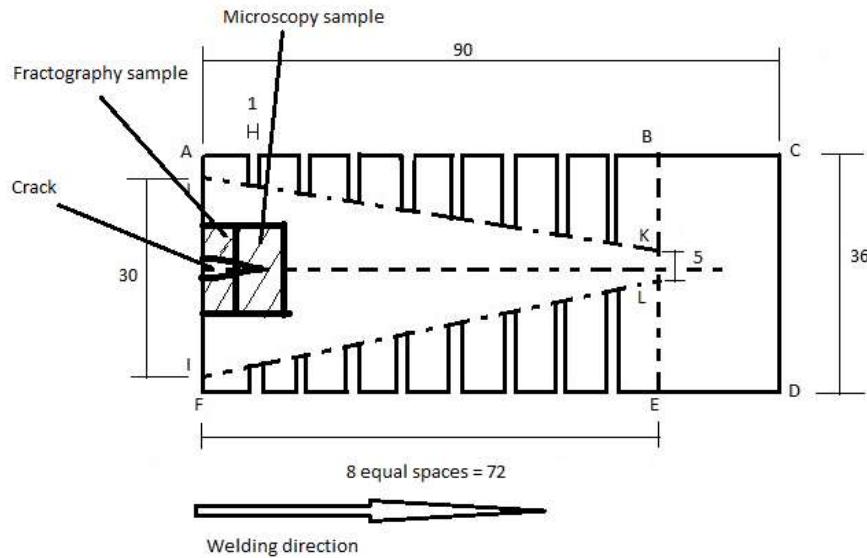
Dimensions of the modified Houldcroft sample. Sectioning of the sample for microstructural and fractography examination are also shown. Automatic autogenous gas tungsten arc welding (GTAW) bead on plate using a Lincoln Electric Square Wave TIG – 355 equipment was employed. The shielding gas was a 99.99% Argon. The welding started on a run-on tab of the same ferritic stainless steel before continuing on the Houldcroft sample. Care was taken to ensure that welding was done in the centre of the Houldcroft specimen. Complete penetration for Houldcroft samples meant different heat inputs was used for the welding speeds of 6 mm/s, 3 mm/s, and 1 mm/s. The welding parameters are presented in Table 2. The average arc efficiency (η) of 0.48 [20] was used to calculate the heat input from equation 1.
